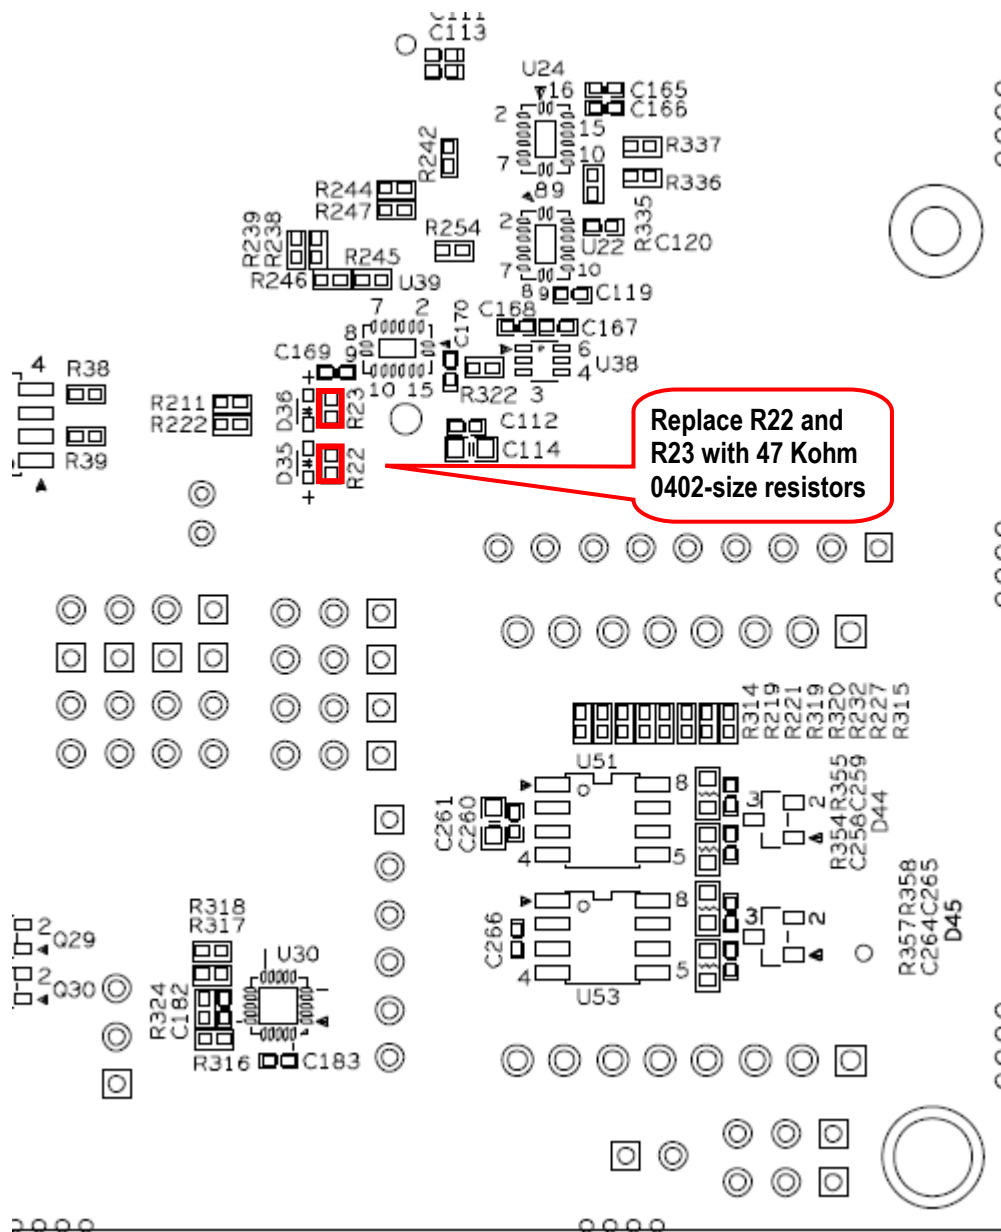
uCOM Carrier Board Rework on Bottom Side
